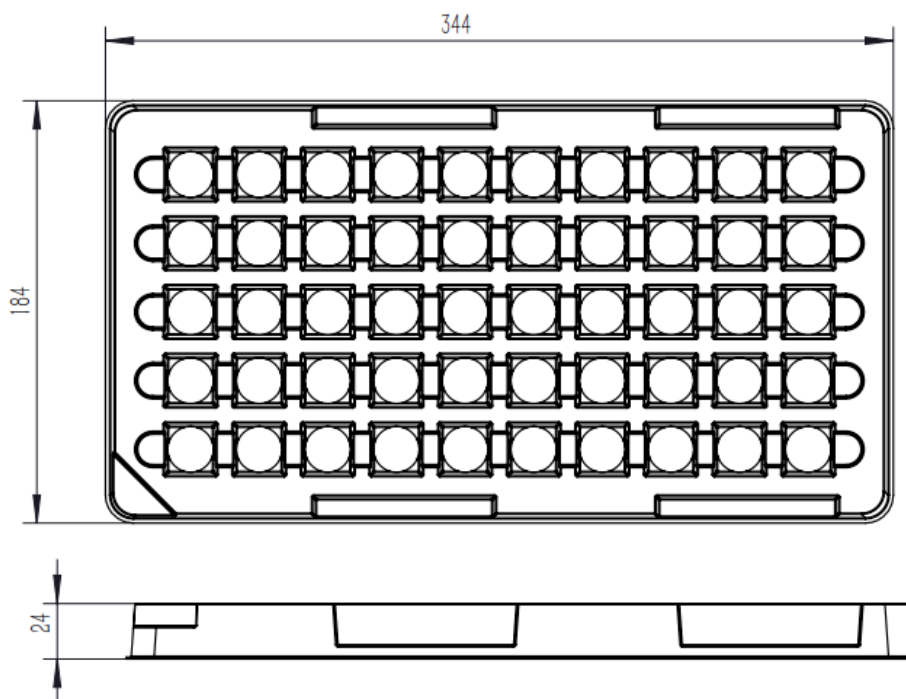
Dimensional drawing of blister tray (unit: mm , general tolerance: ISO2768-mK)
